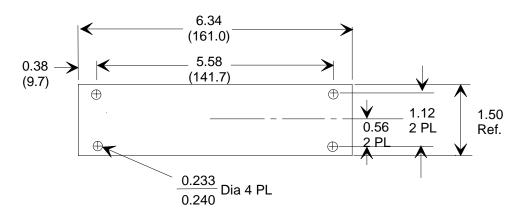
Mounting Dimensions of the Base Aluminum Plate
